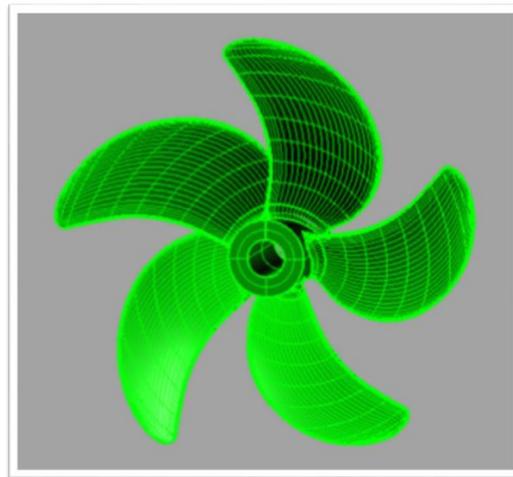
The completed solid propeller after polar arraying and joining all the blade surface and hub together.
